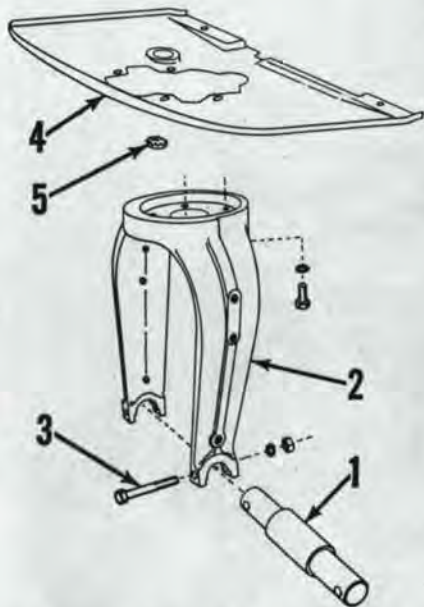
Exploded view of the single front wheel fork and associated parts.
